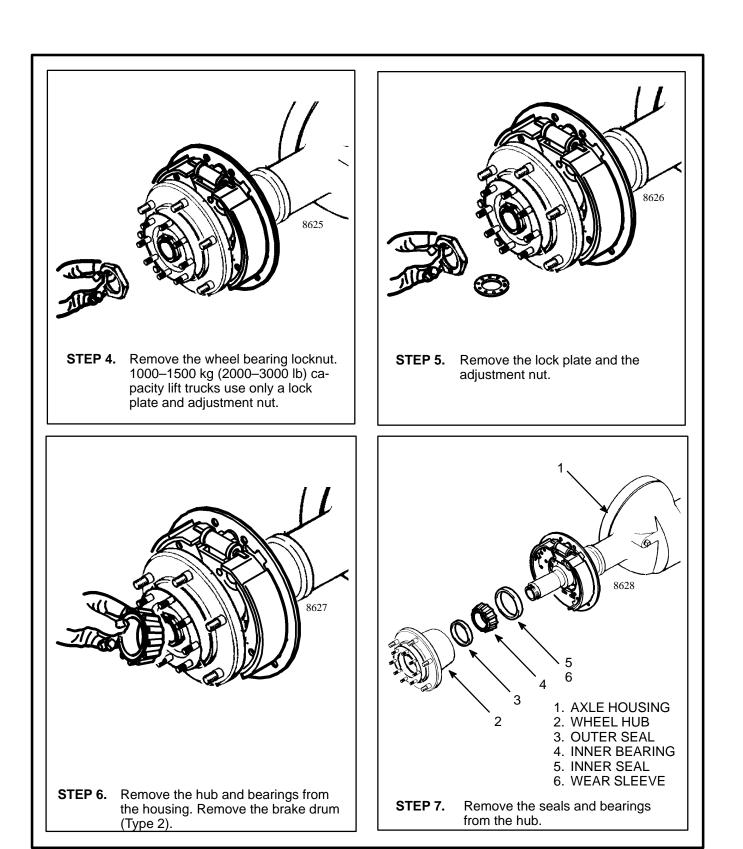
DISASSEMBLY OF THE DRIVE AXLE (2 of 2) (TYPE 1 SHOWN)
